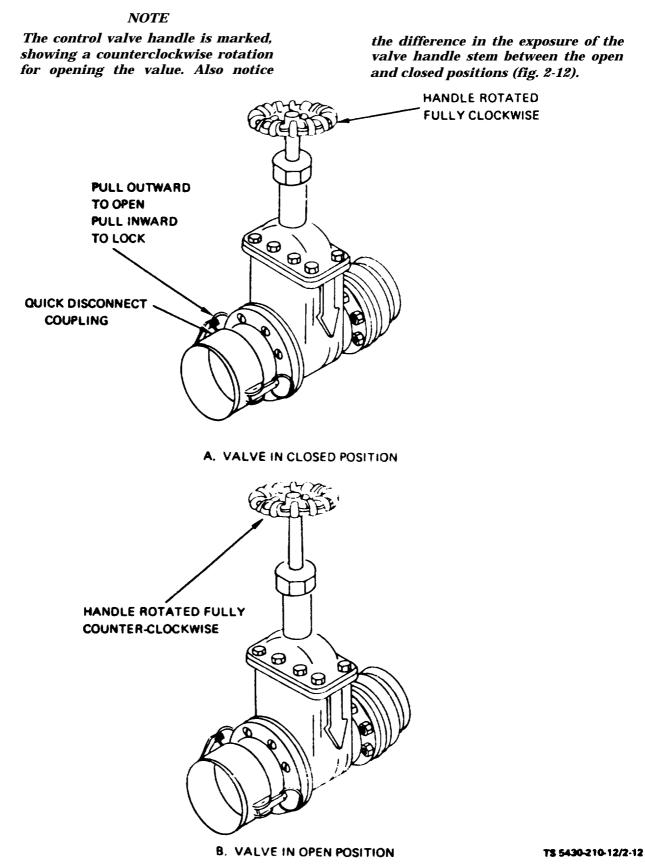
Filler and Discharge Valve in Open and Closed Positions (3,000, 20,000 and 50,000 Gallon Tanks).
